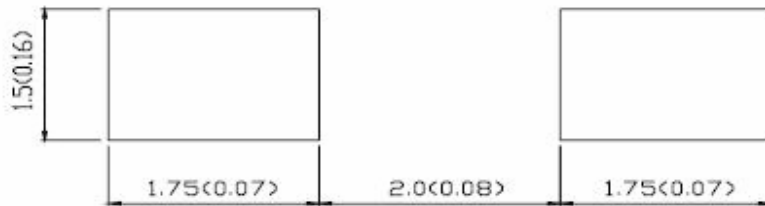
SMD 1206 Recommended Soldering Pattern Unit: mm
